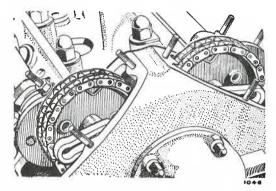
Showing the camshaft sprockets disconnected from the camshafts and slid up the support brackets.
